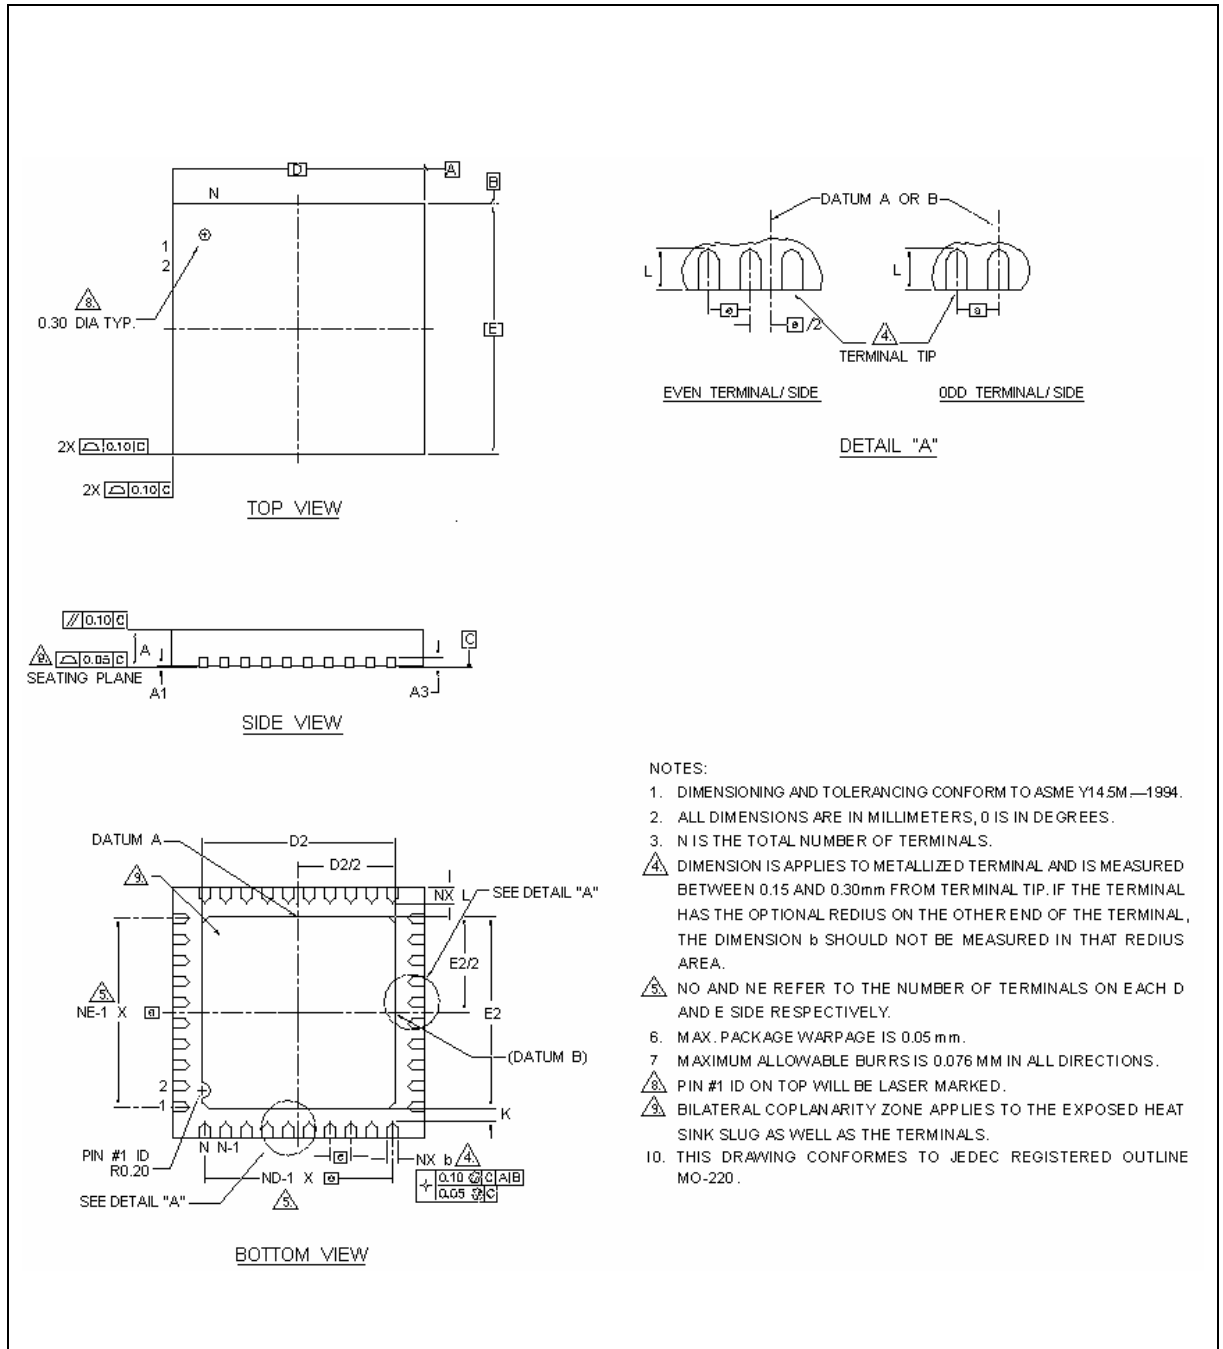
FM17XX 28-Pin QFN Package Dimensions
